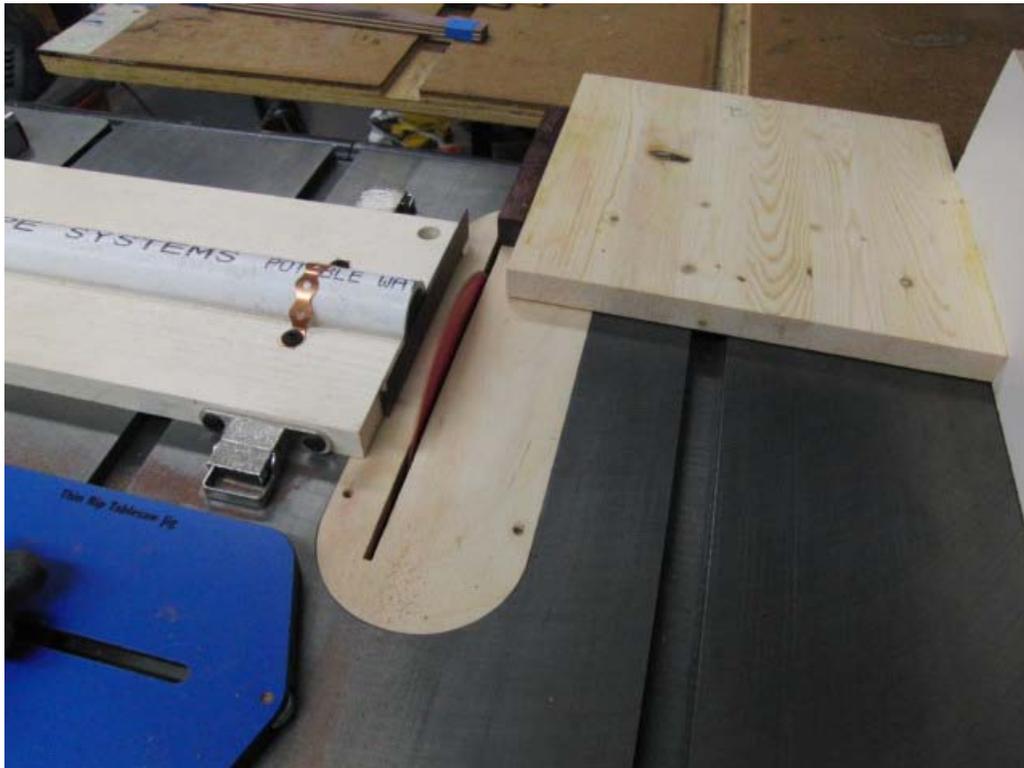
1/16" ... humm I need them thinner. Adjust the Rocker jig and rip again.
